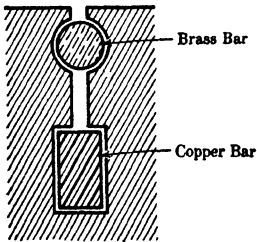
Section through the rotor slot of a typical double-squirrel cage motor.
